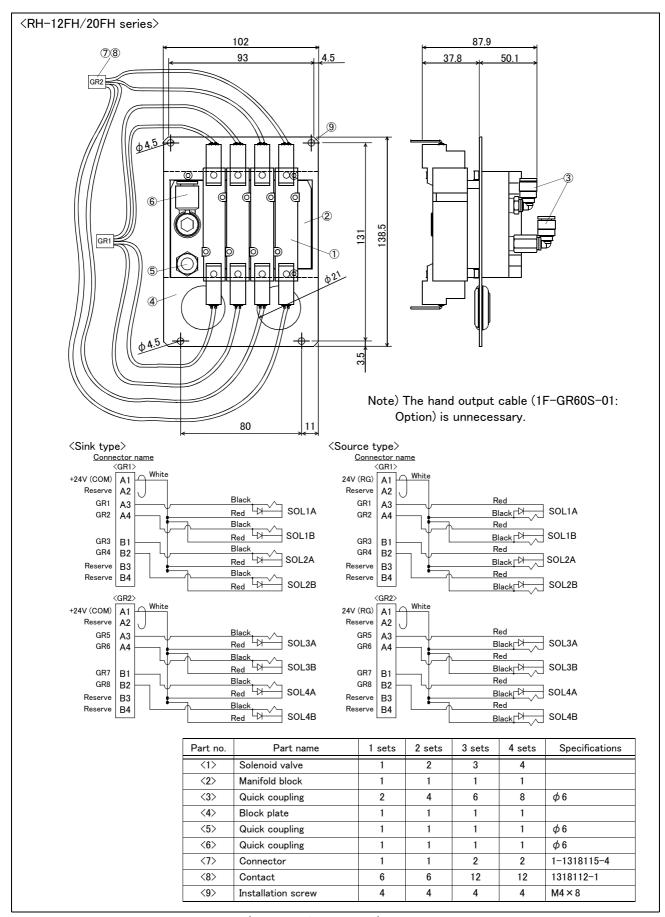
Outline dimensional drawing (RH-12FH/20FH series)
